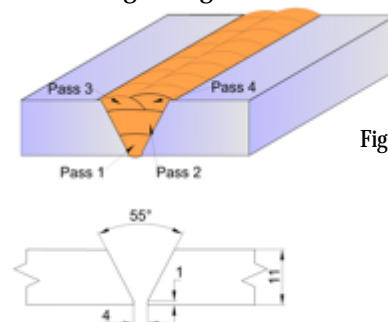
Schematic drawing of edge preparation and welding configuration
